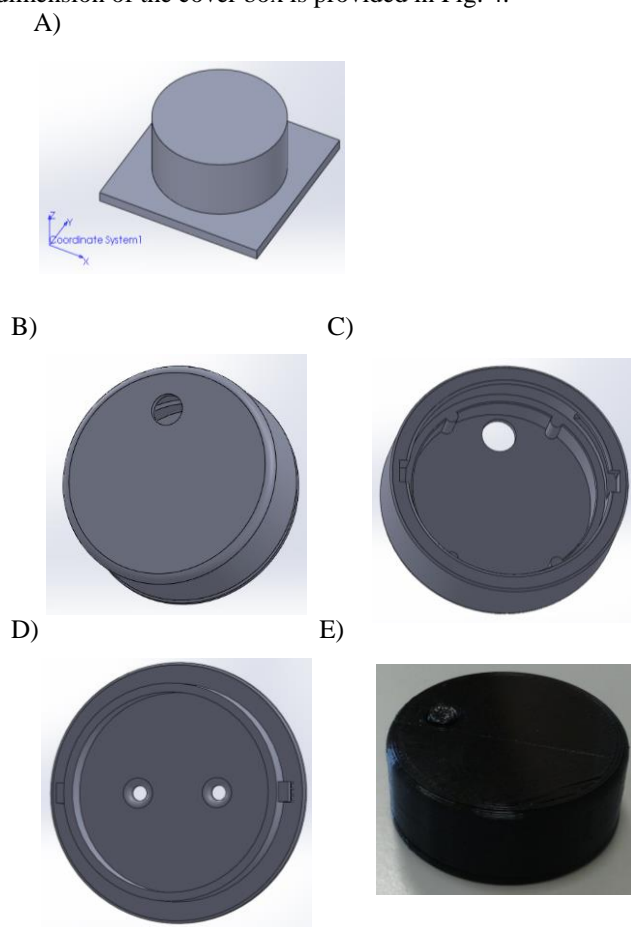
(A) Cover box for BLESensor: Button to switch electronic device, (B) Assembled parts of box, (C) Case of the box, (D) Cover of the case, (E) Final printed product with sensor inside.
